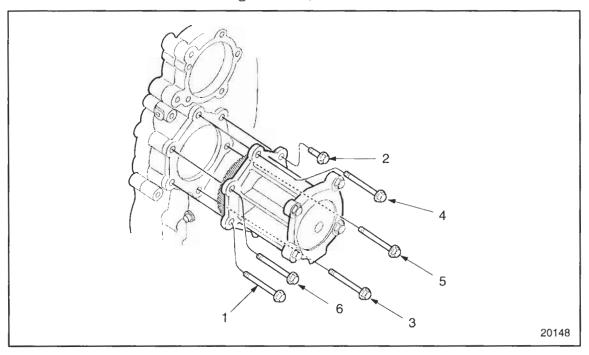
Gear Case Cover Bolt Torque Sequence (Left Rear)
